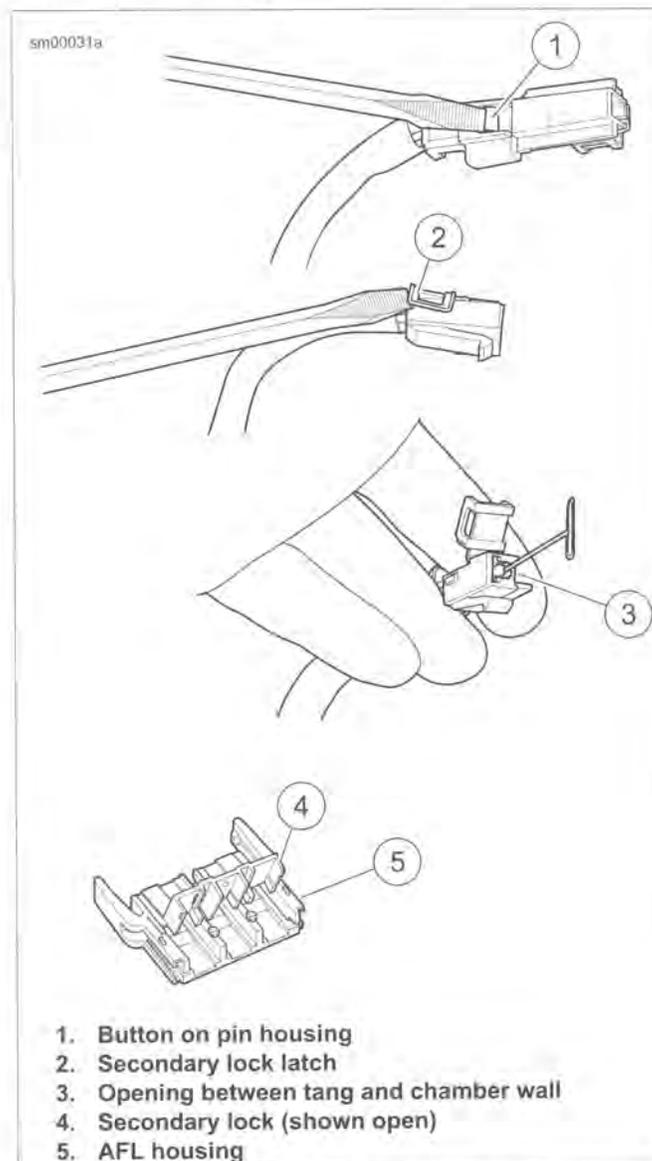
Delphi 480 Metri-Pack Unsealed Connector: Remove Socket Terminal
